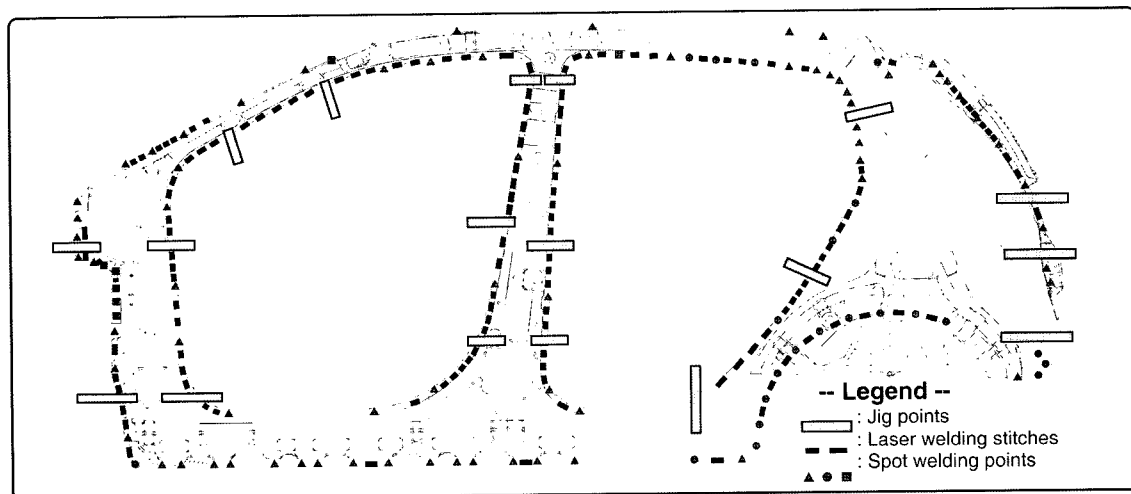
Generation of laser welding stitches, spot welding points and jig points.
